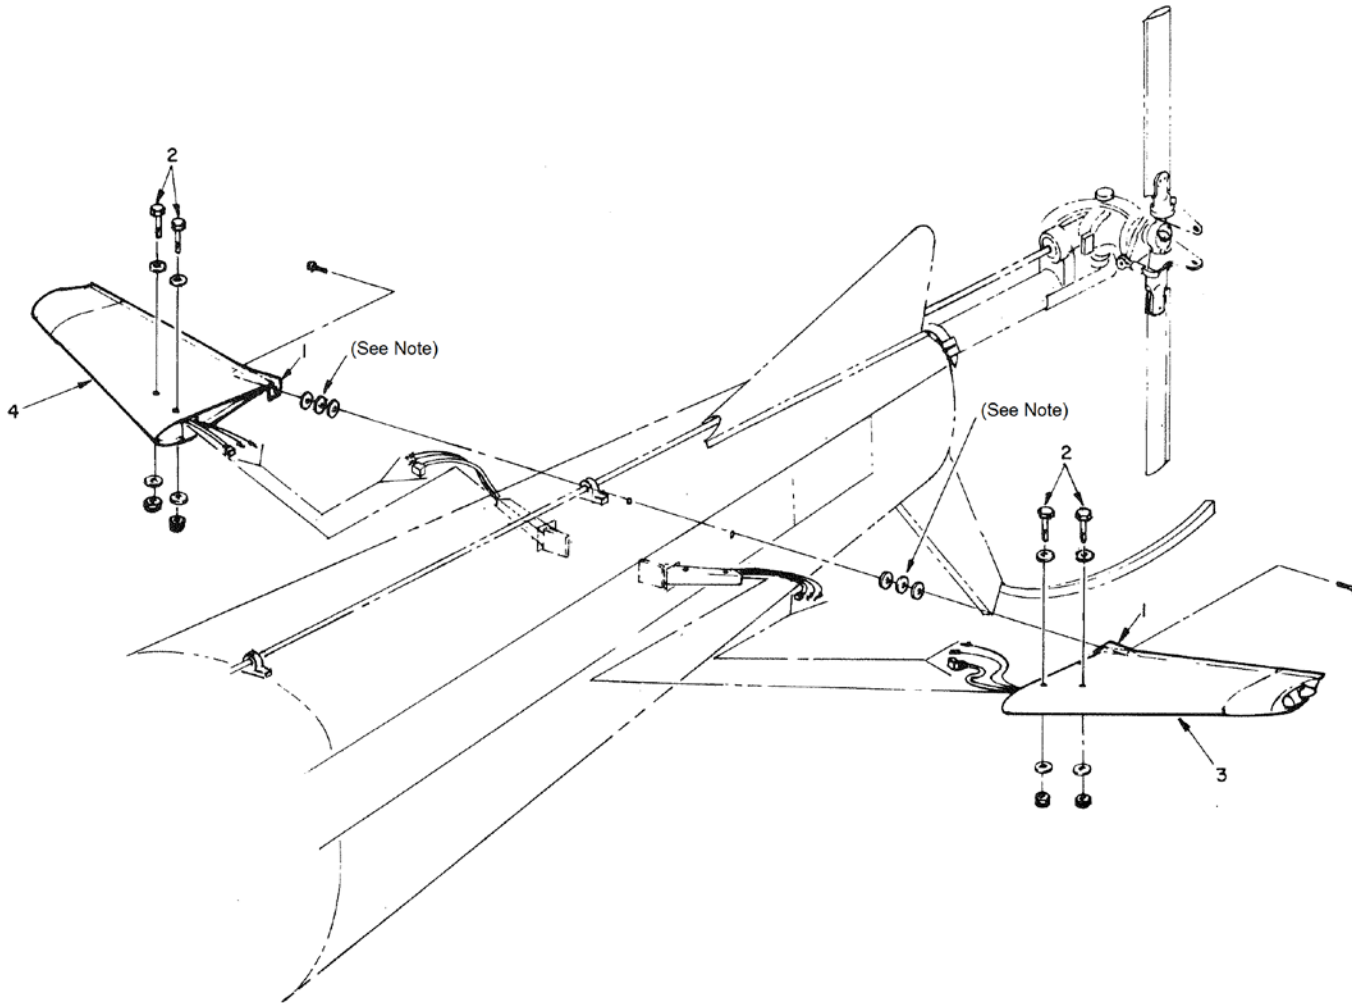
Horizontal Stabilizer Installation (F-28F Pre-1986)
